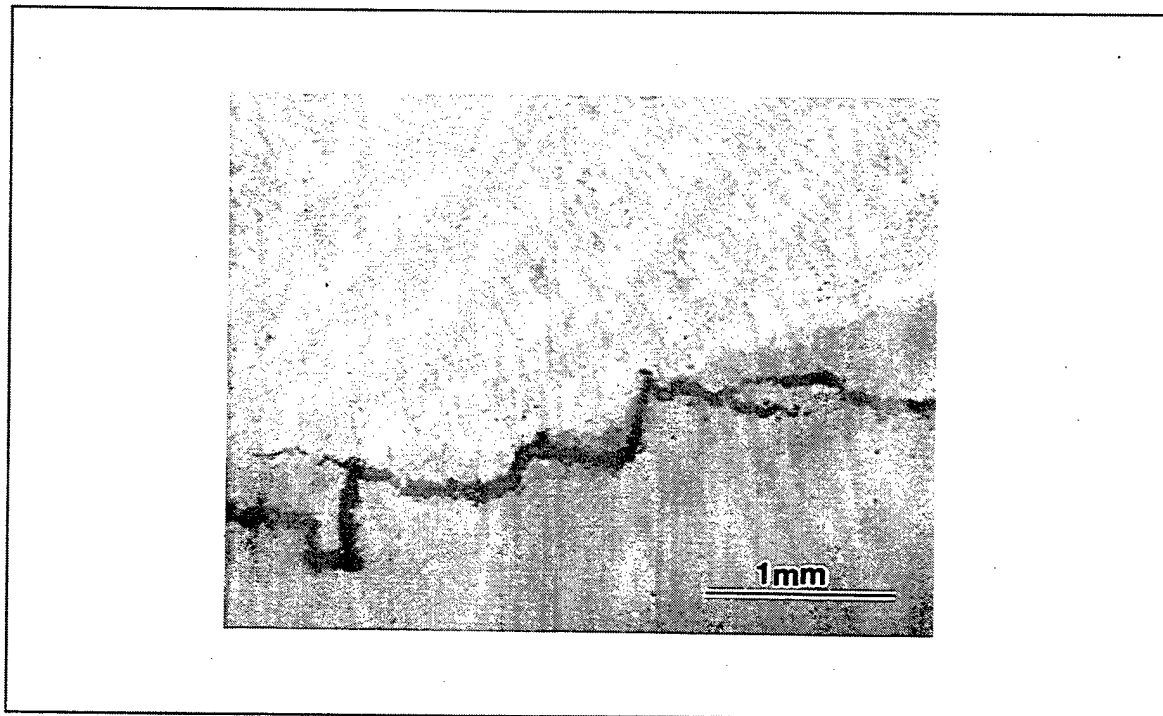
Underbead cracking fourth from top. The crack steps along the fusion line between the weld metal and the HAZ. UWW03
